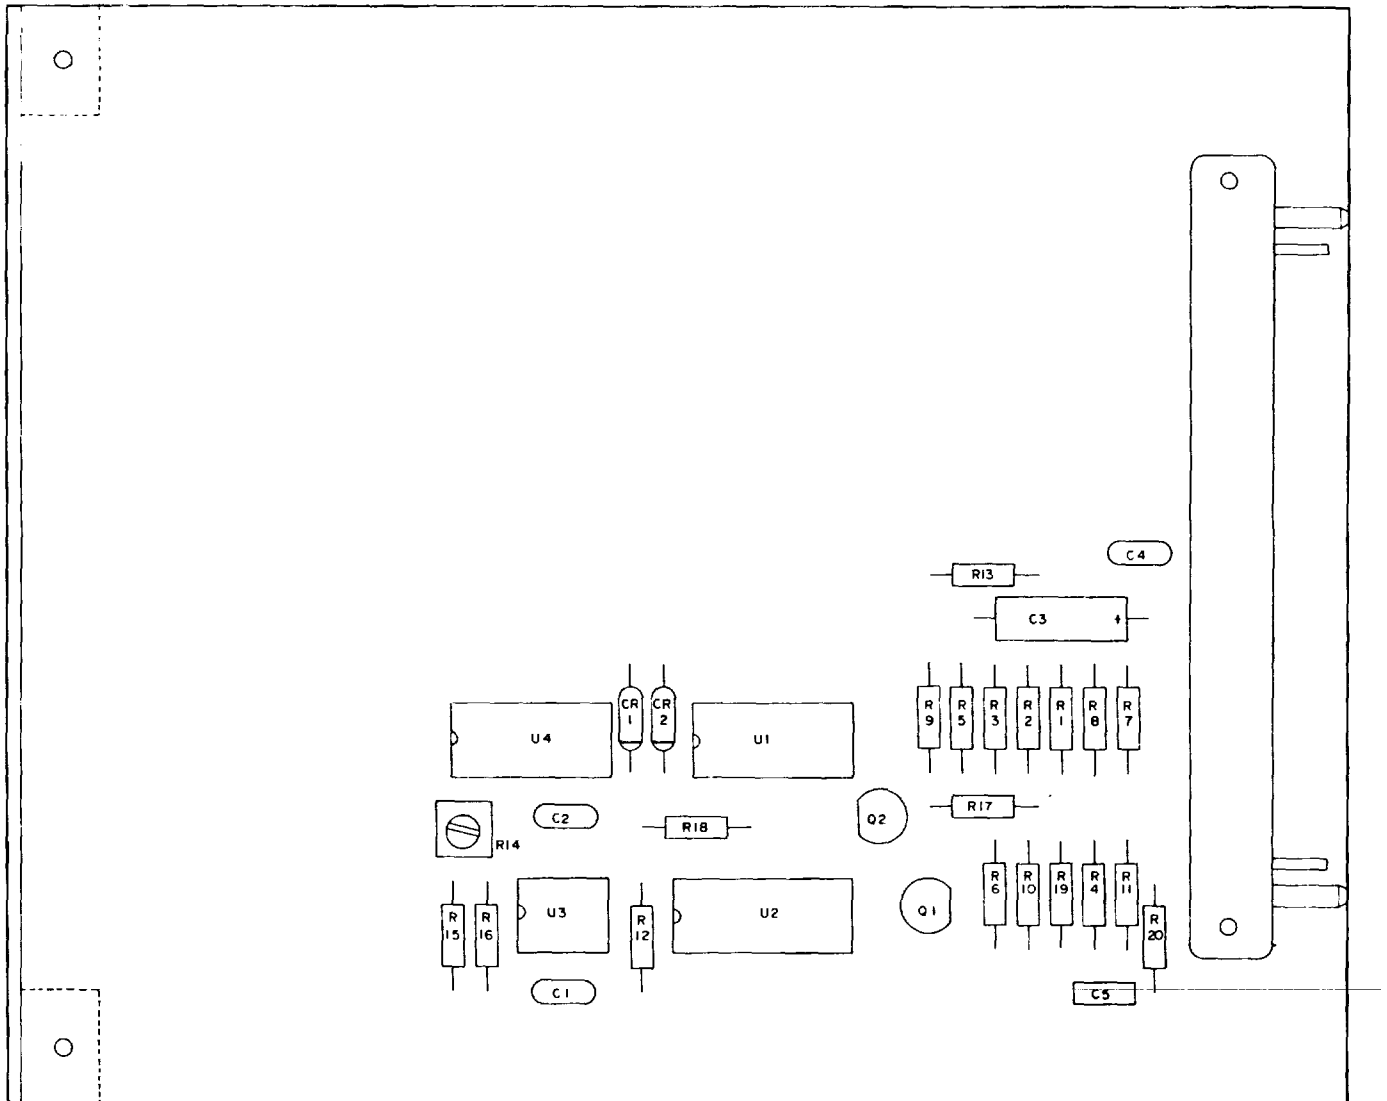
Ident Control Circuit Card Assembly, 1A2A3
